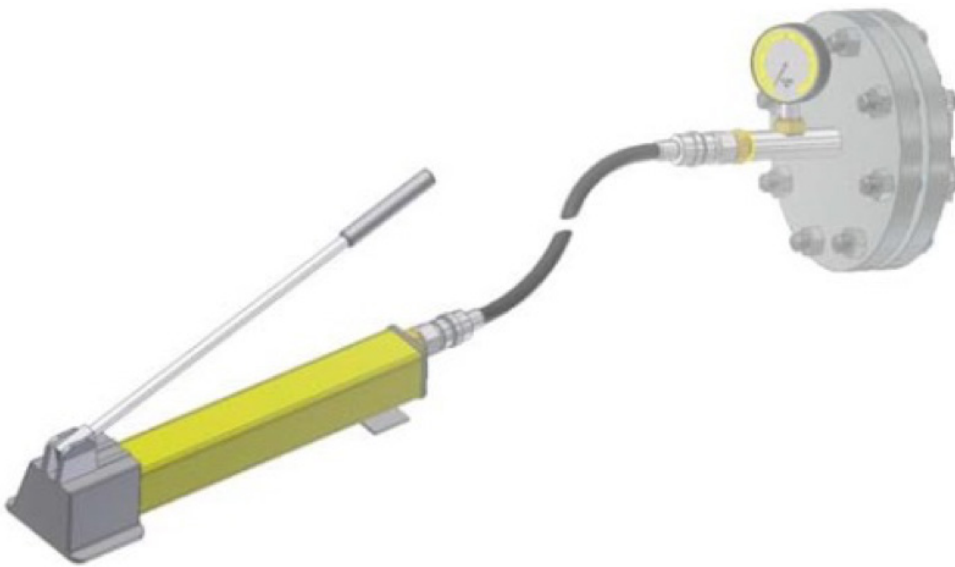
Test set-up for pressurized water testing (flange A to the left/flange B to the right)
